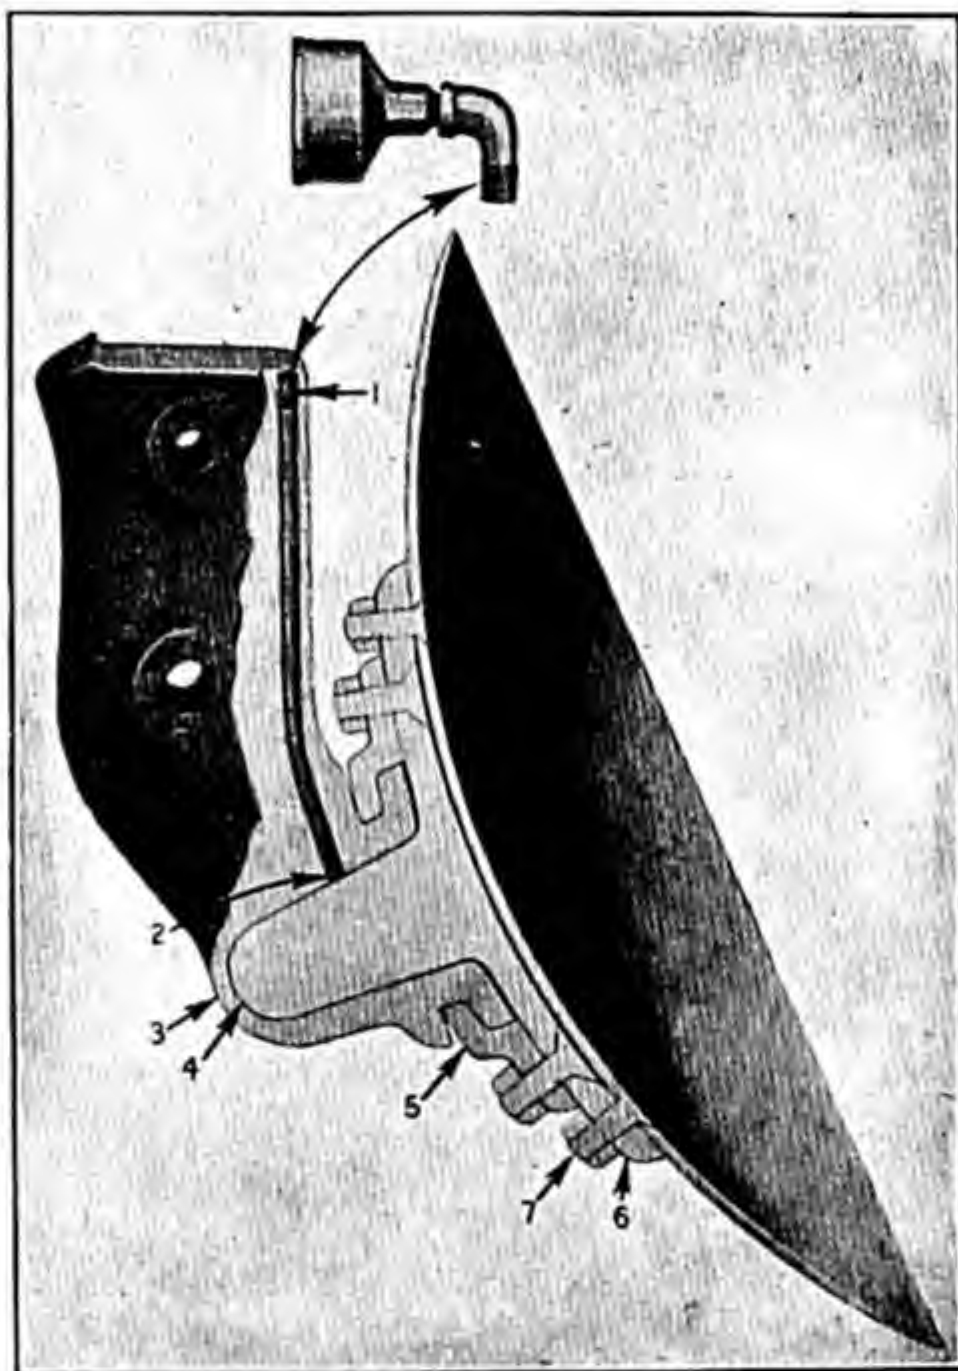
Cross section of cone-type disk-plow bearing: 1, point where grease cup is attached; 2, oil tube; 3, cup for cone; 4, cone; 5, flange to hold bearing in place; 6, disk casting to hold disk blade; 7, bolt to hold disk blade.
